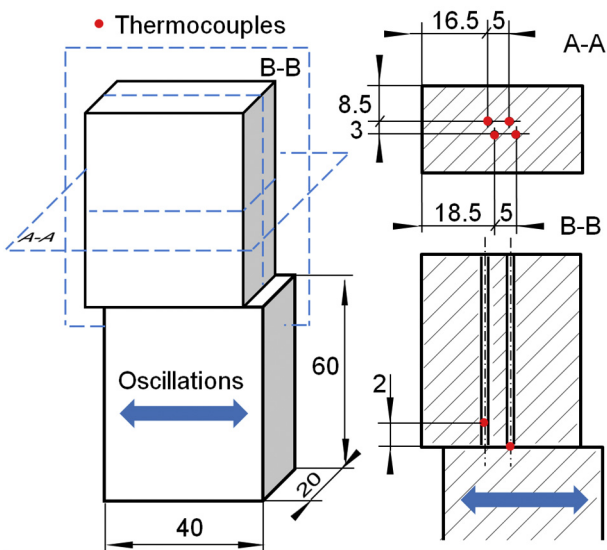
Workpiece dimensions for both parts (dimensions in mm). Thermocouples were positioned in the holes shown in sections A-A, B-B, at distances of 0, 0.5, 1.5 and 2 mm from the interface.
